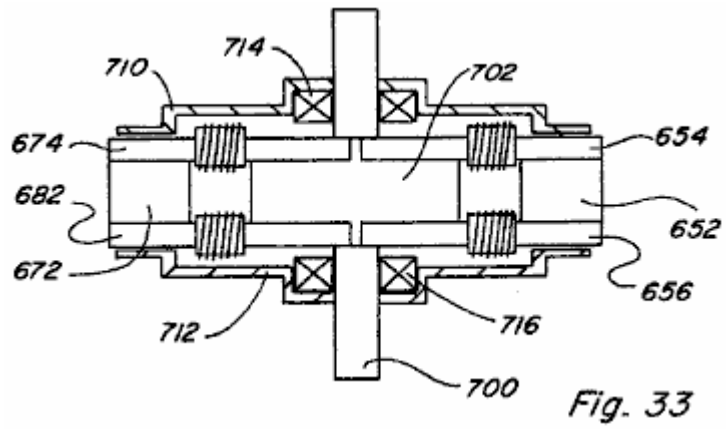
is a side view of the rotary motion device of Fig.31 as assembled and including a housing;
